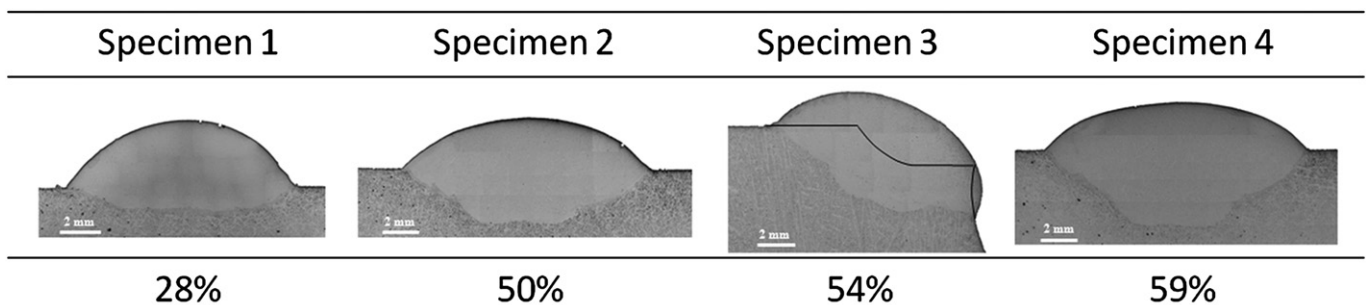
Dilution induced by PTA process using different weldments: specimen 1 – 100 A, specimens 2 and 3 – 128A, specimen 4 – 140 A.
